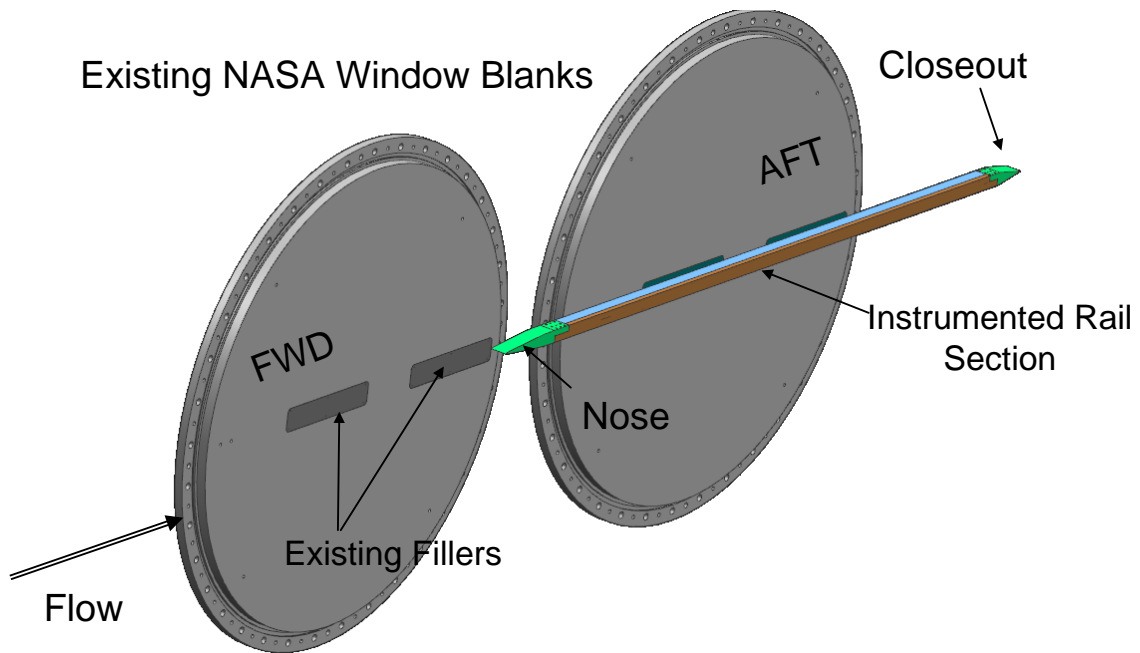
Installation of 2-in Sonic Boom Pressure Rail on North Wall Aft Window Blank
